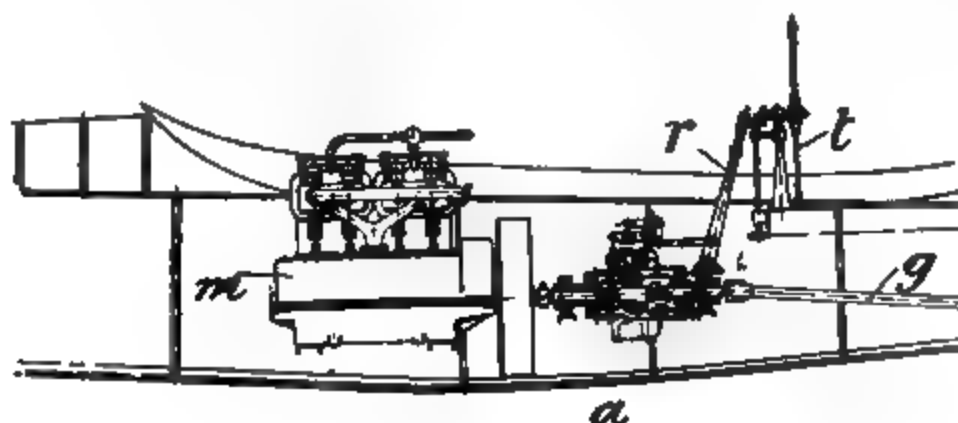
Pittler Hydraulic Reversing Gear applied to a Motor-launch.
